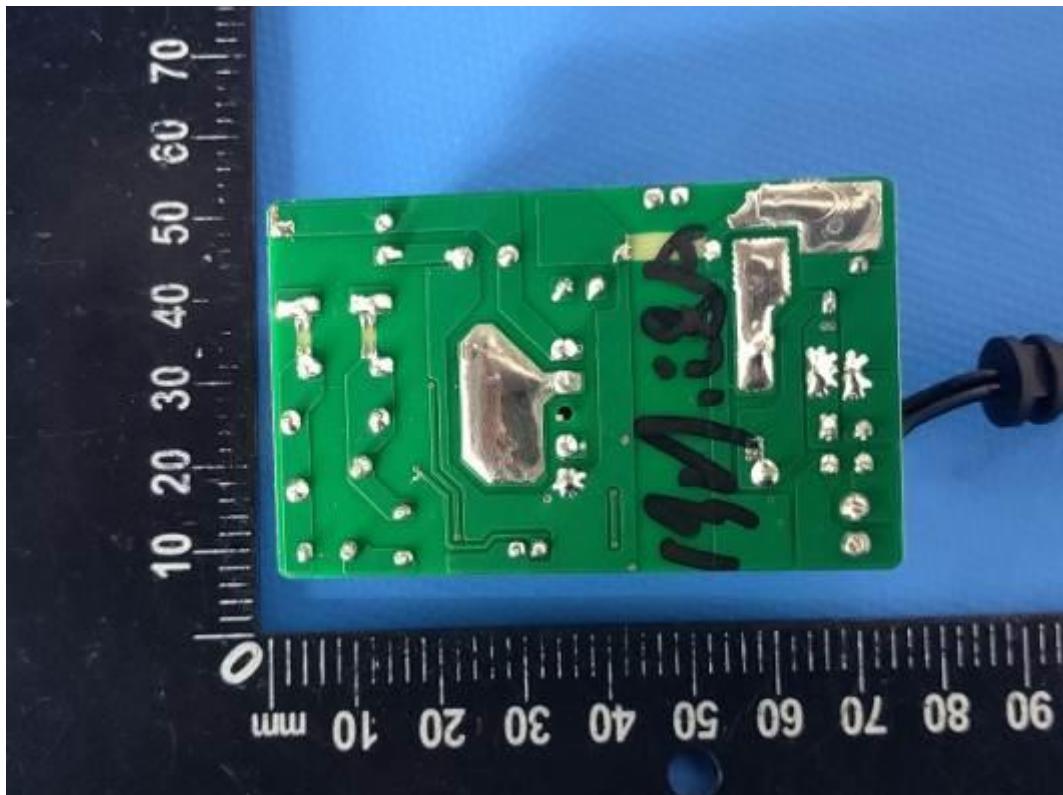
PCB trace side view (PCB layout DYS830B-P01)
